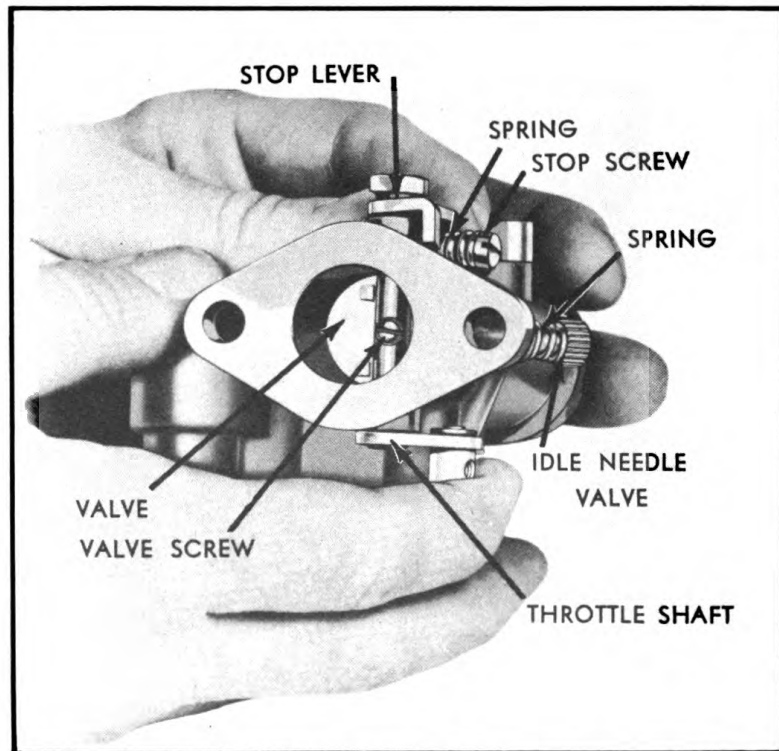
Reassembly of Throttle And Idling Needle Valve
